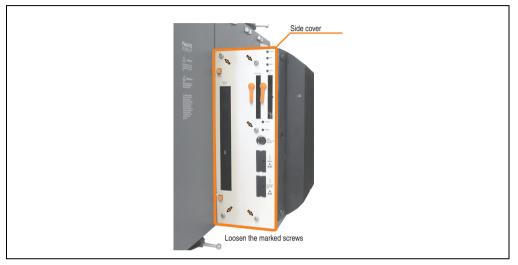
Example - Side cover removal on the system unit 5PC720.1505-02
